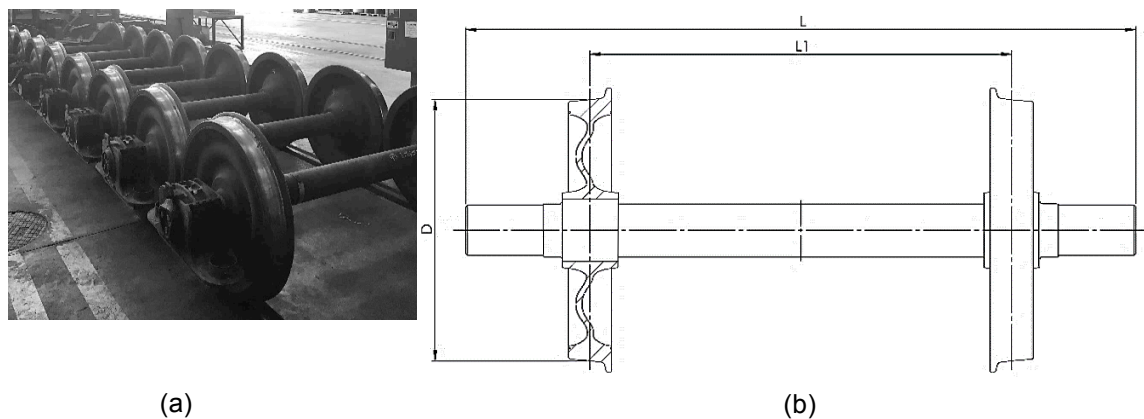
Wheelsets: (a) with rigid axles and solid wheels, (b) a technical drawing representation.
